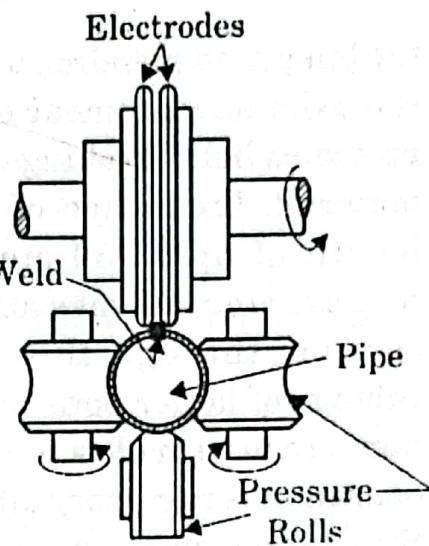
Use of electric resistance welding for production of continuous welded pipe.
